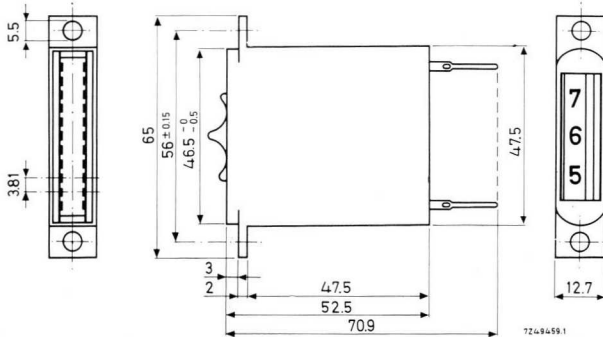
Dimensions of type FM thumbwheel switches
